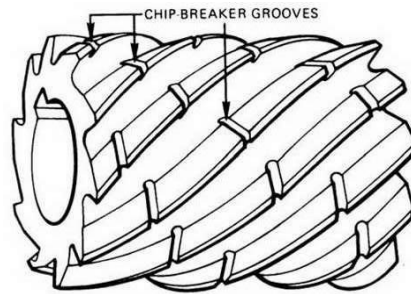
Chip breaking grooves on a plain helical milling cutter
